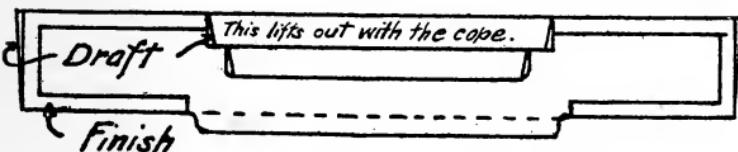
Drawing of Pattern for Cylinder Cover Showing Allowances. Measured with the Shrinkage Rule
